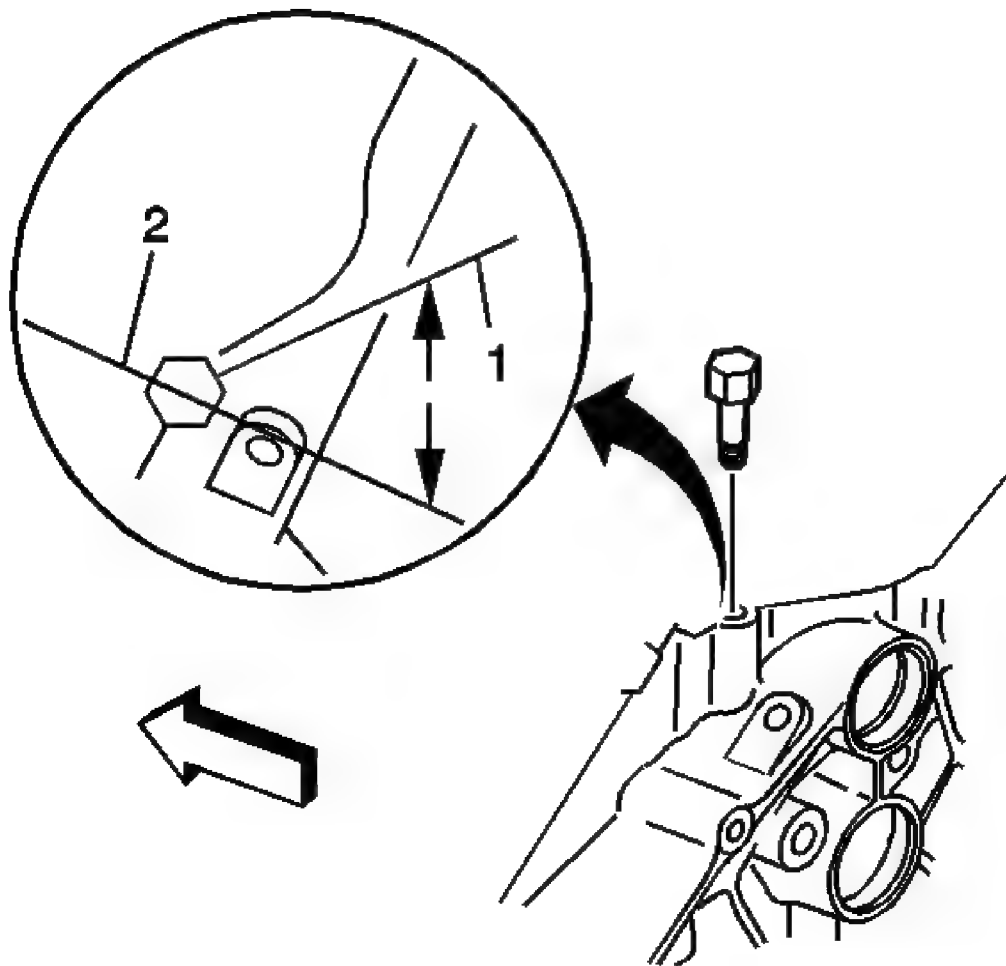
View Of Engine Oil Pressure Sensor Fitting
